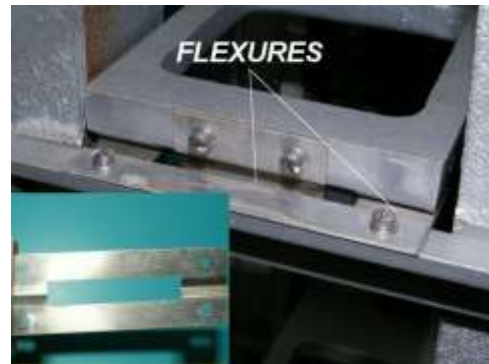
Damaged Horizontal Flexure - Note the V-shape bend.
